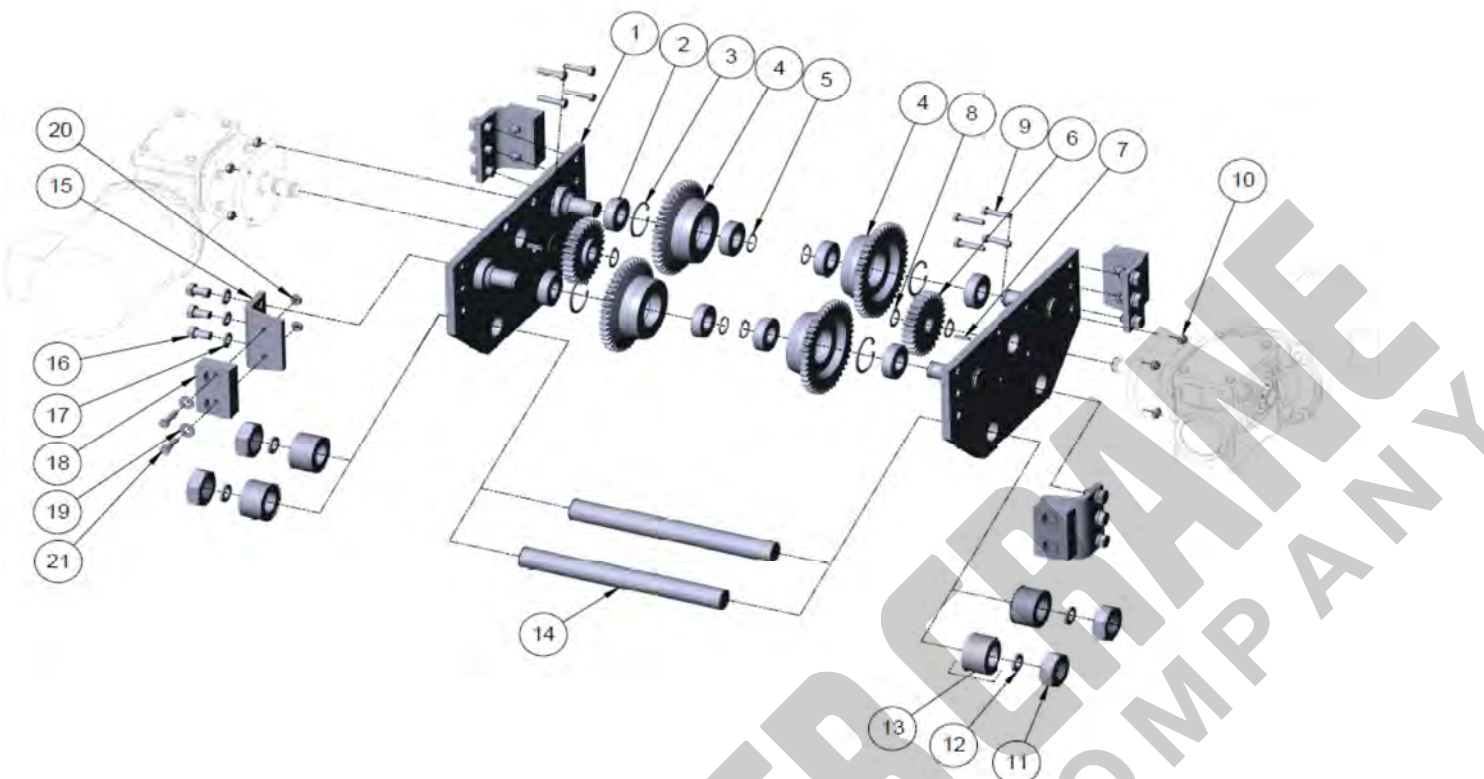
Trolley Frame and Wheel Assembly Two Motor 6-1/4" Wheels
